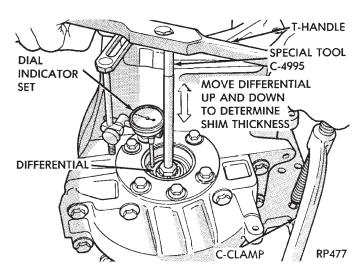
Checking Differential Bearing End Play to Determine Shim Thickness
